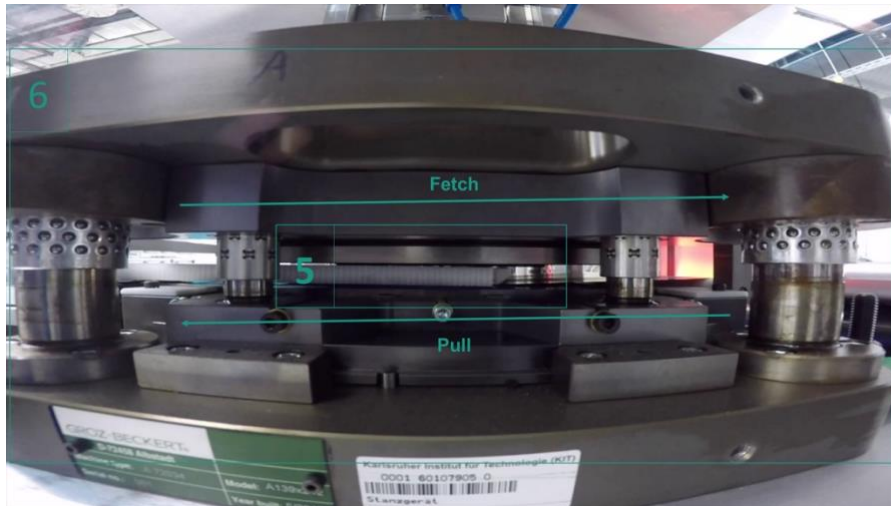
Gripper moving through the die-cutting tool to fetch the material.
